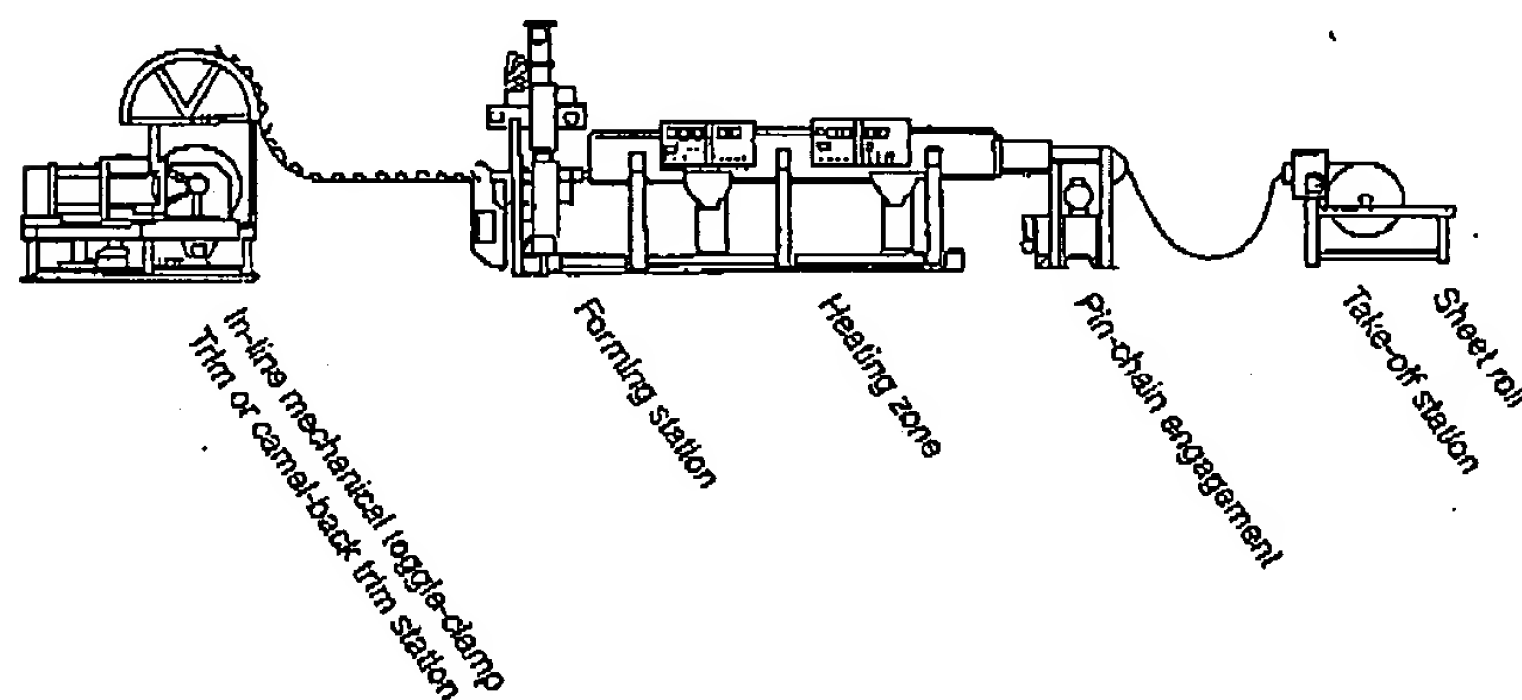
Schematic of large thin-gauge thermoforming machine (Battenfeld—Glouster, Glouster, Mass.) (12). Used with permission of Hanser Publications.
